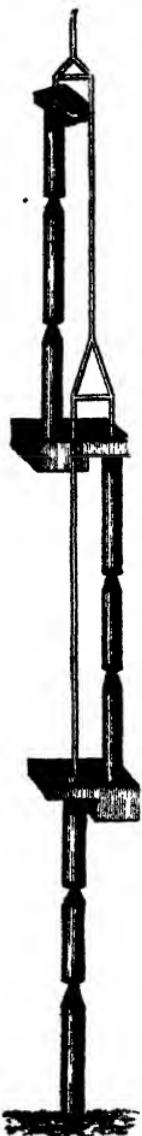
VALVE-GEAR OF GRIFF ENGINE.
